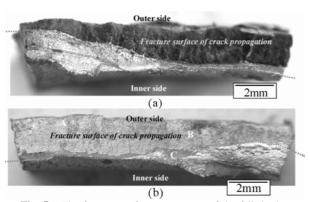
The fracture surface appearance of the failed tube: (a) before descaling; and (b) after descaling.
